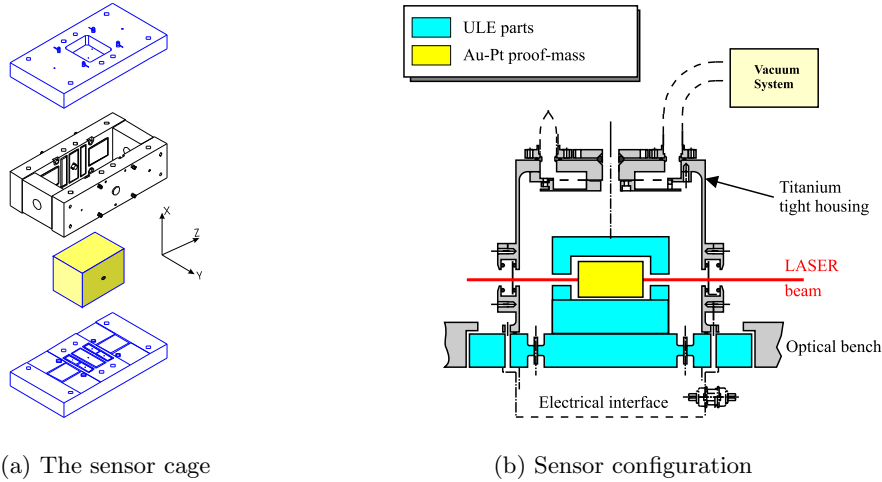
Layout of one gravitational sensor: (a) exploded view, (b) with vacuum housing.
